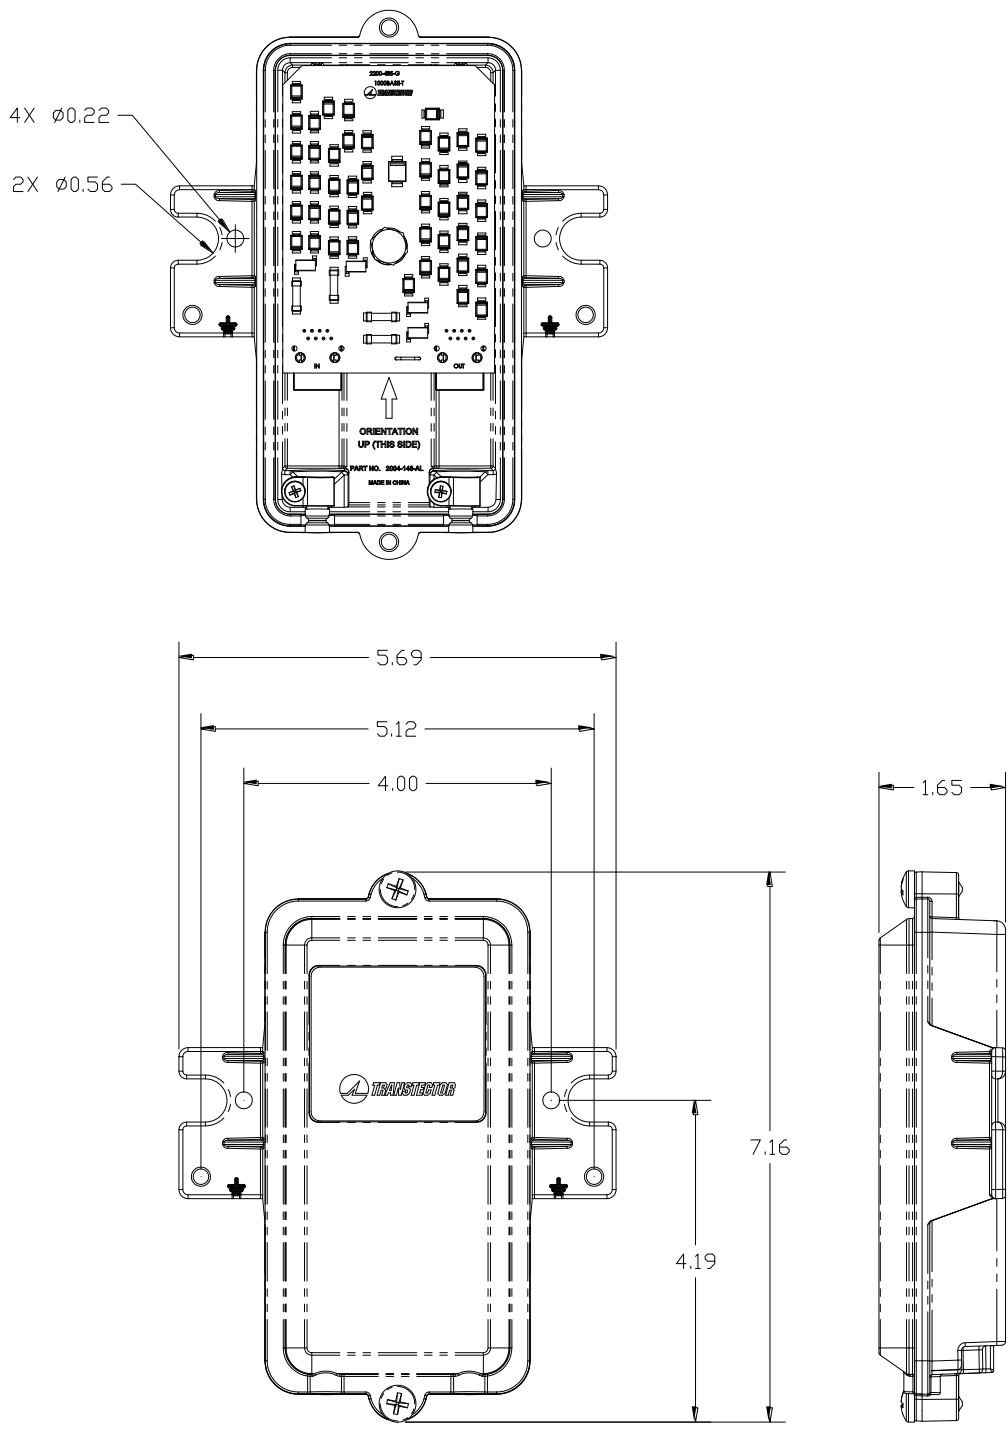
MECHANICAL OUTLINE METAL ENCLOSURE DRAWING INCHES.
